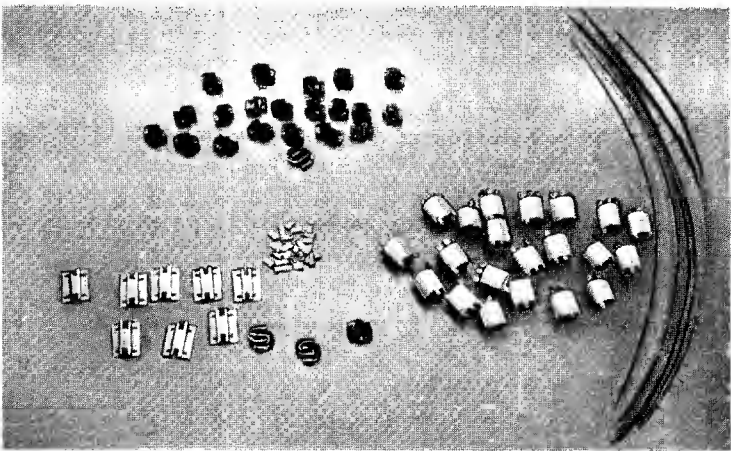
Cores, seals, mounting brackets, coils and bands laid out for assembly
